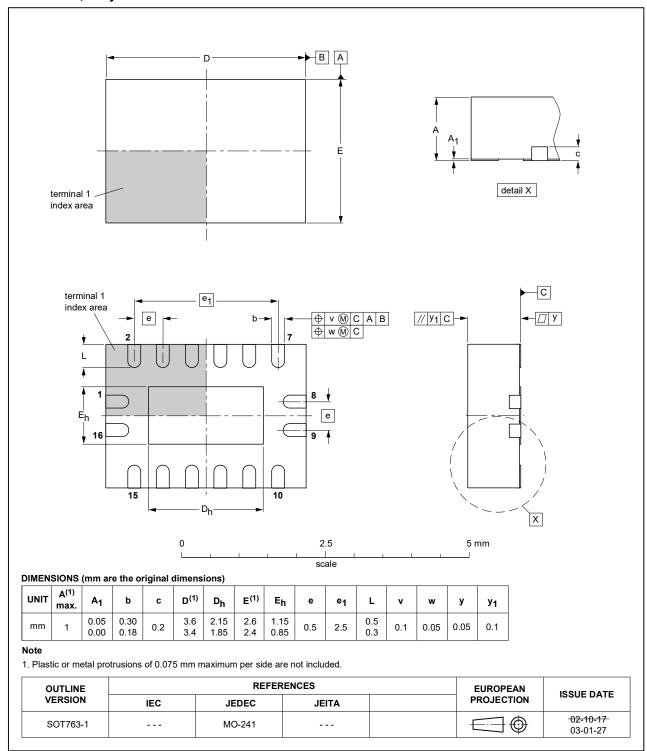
Package outline SOT763-1 (DHVQFN16)
